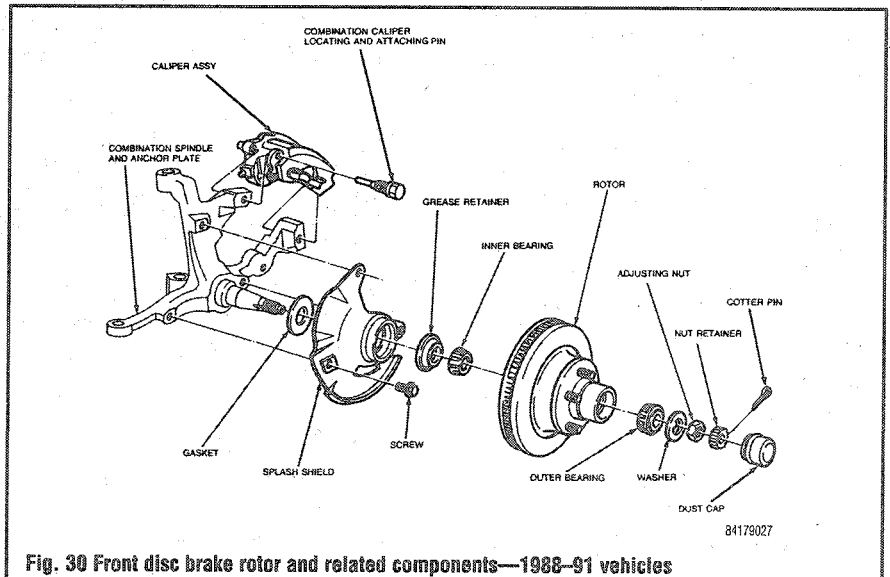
Front disc brake rotor and related components—1988–91 vehicles
